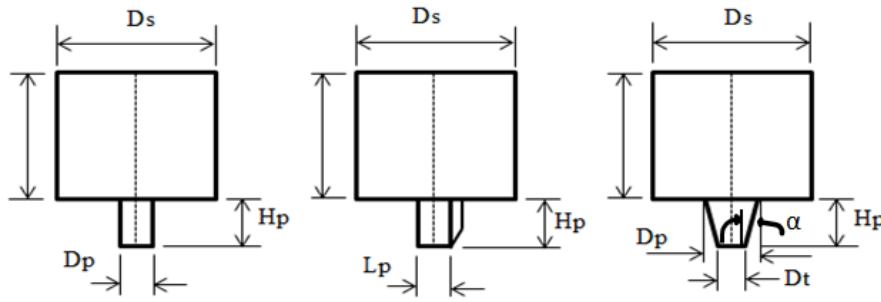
Tool geometries: straight cylindrical, square and taper cylindrical tool
